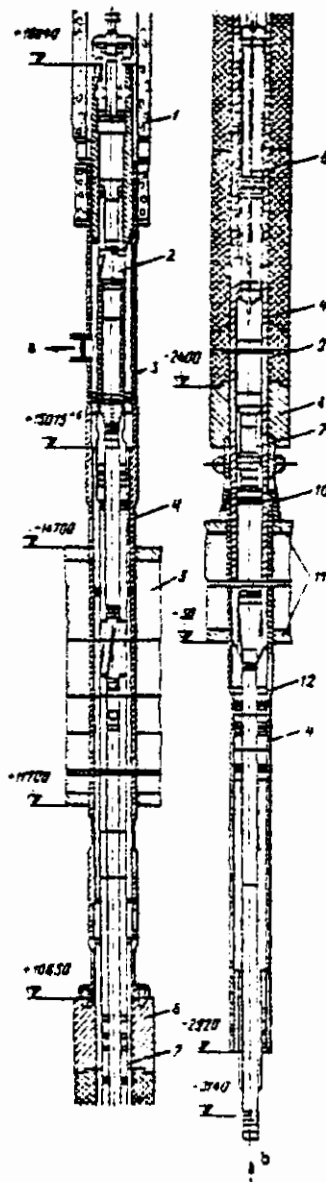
A fuel channel: 1) protection unit; 2) FA suspension; 3) FC head; 4) pressure tube; 5) upper protection plate; 6) thermal shield; 7) steel-zirconium joint; 8) FA; 9) stack block; 10) supporting vessel; 11) lower plate; 12) channel section; a) steam-water mixture outlet; b) water inlet.
